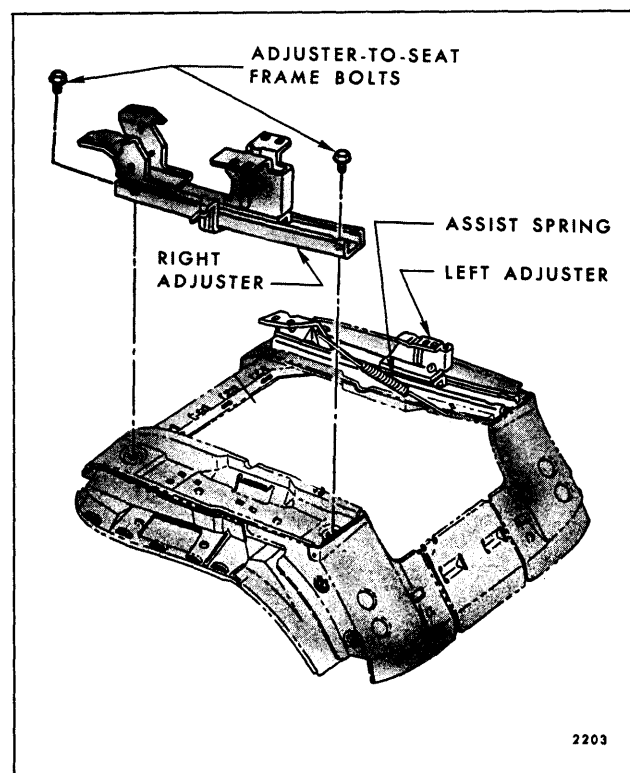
Manual Bucket Seat Adjuster Removal
